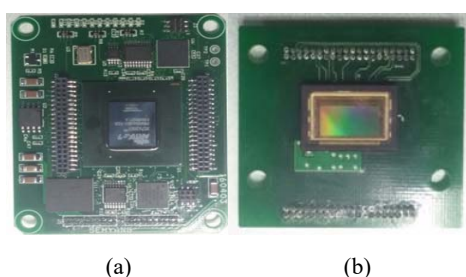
Line scan camera parts: (a) drive and (b) sensor
